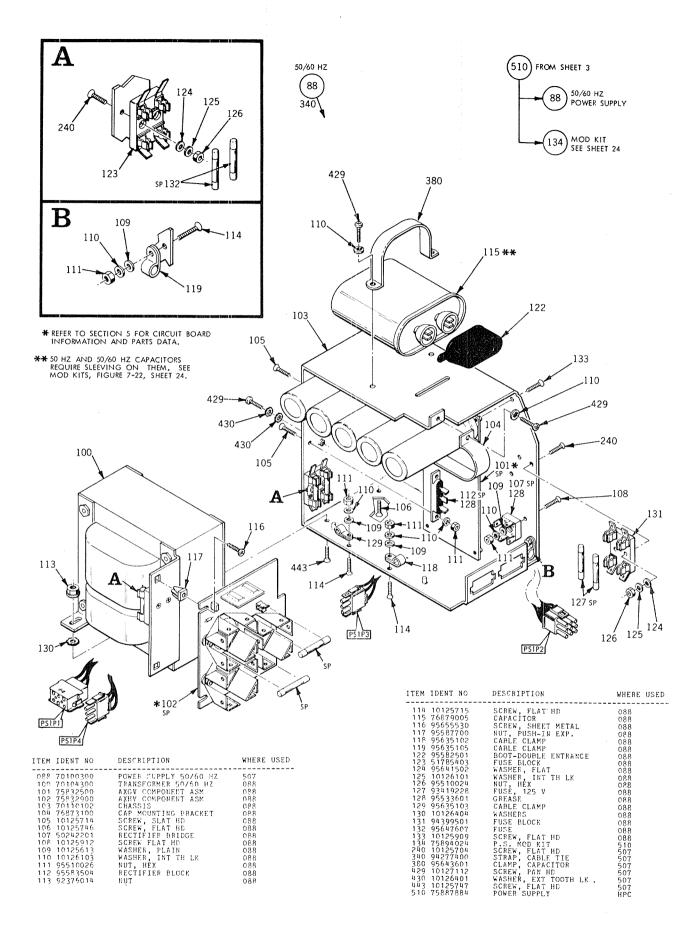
POWER SUPPLY ASSEMBLY
